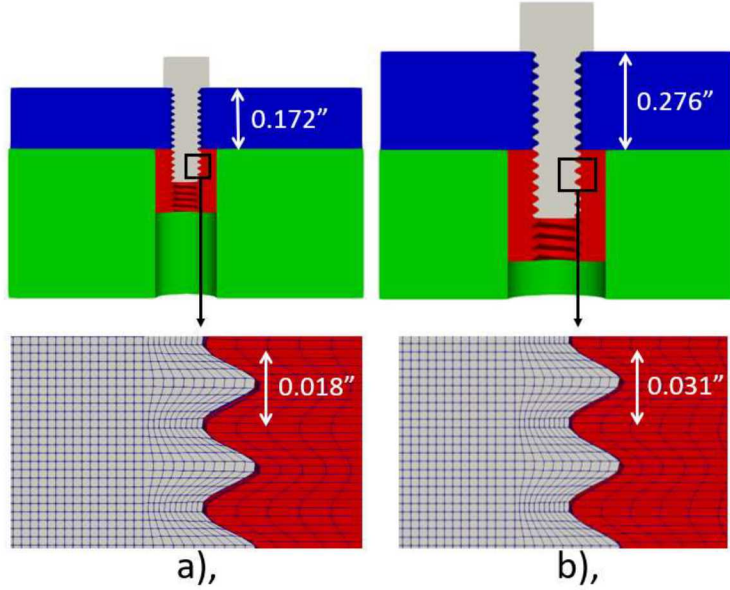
Finite Element Models of #06 Fastener. A.) Axisymmetric Thread Wedge Model, B.) Helical Thread Fully 3D Model.
